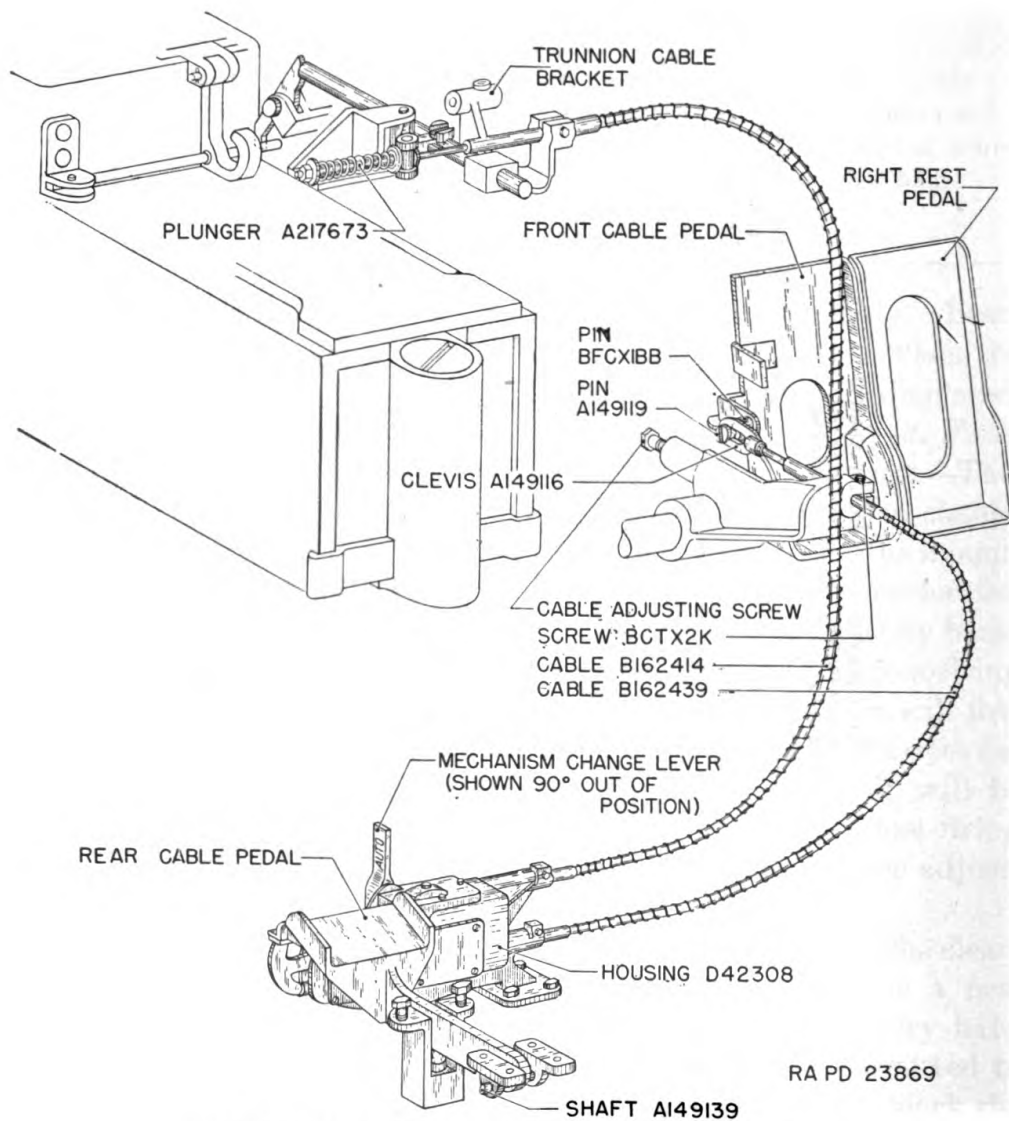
Foot-firing mechanism, M3A1 carriage.
